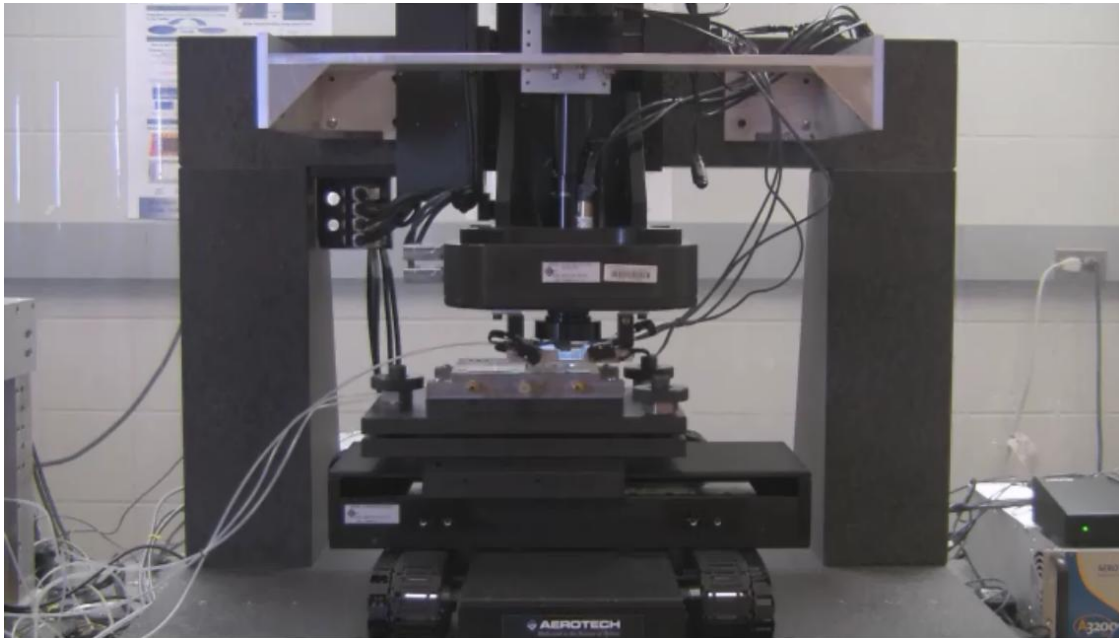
A photograph of the printing machine used to assemble the 3J/Ge solar cells. Reference on parallel, wafer-scale transfer printing process: Justice, J. *et al.* Wafer-scale integration of group III–V lasers on silicon using transfer printing of epitaxial layers. *Nature Photonics* 6, 610–614 (2012).
